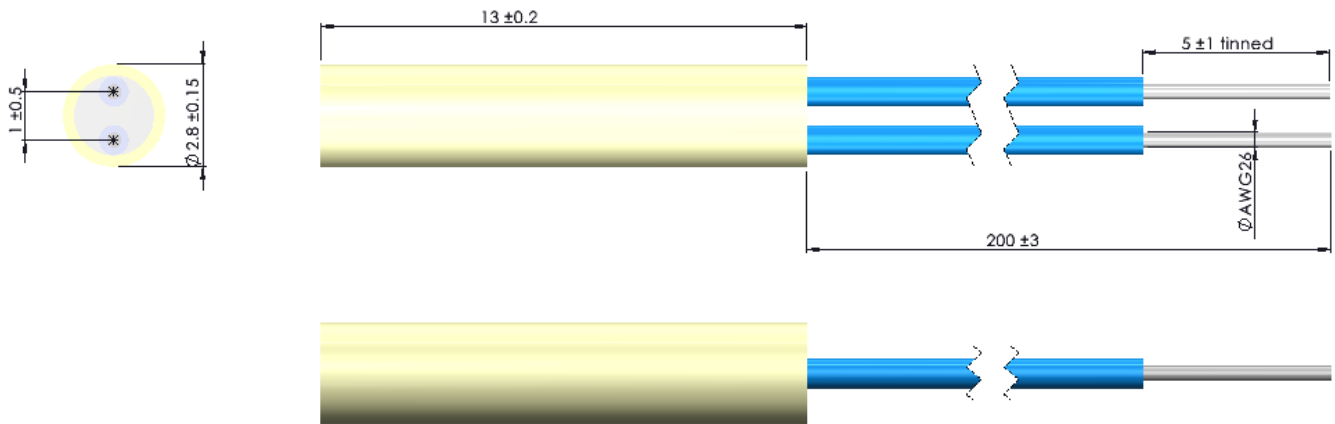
Mechanical dimensions of Platinum Temperature Sensor
